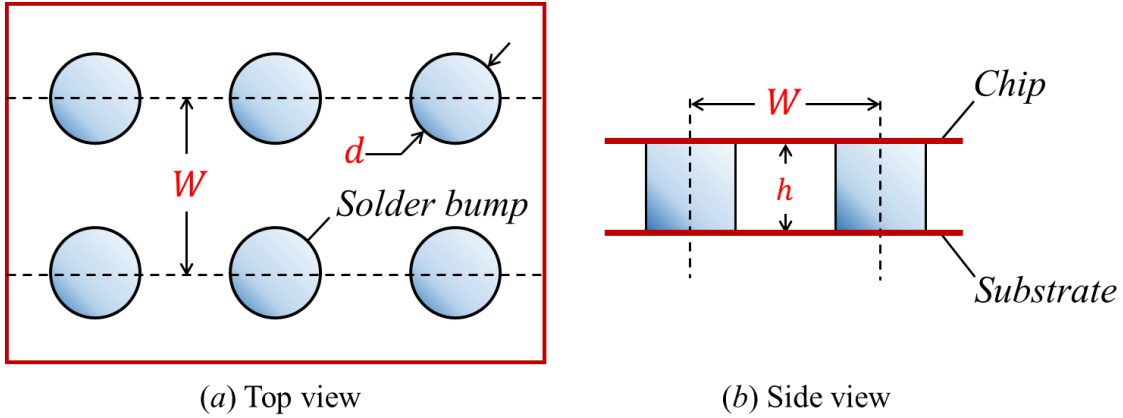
Geometrical dimensions of a flip-chip bump array [17]
